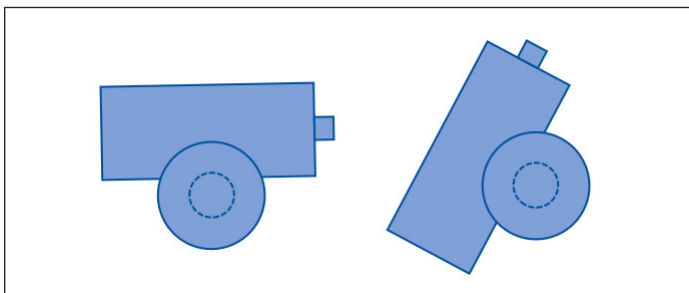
Single Gear Bleeding Procedure - Shaft Below Piston Cylinder
